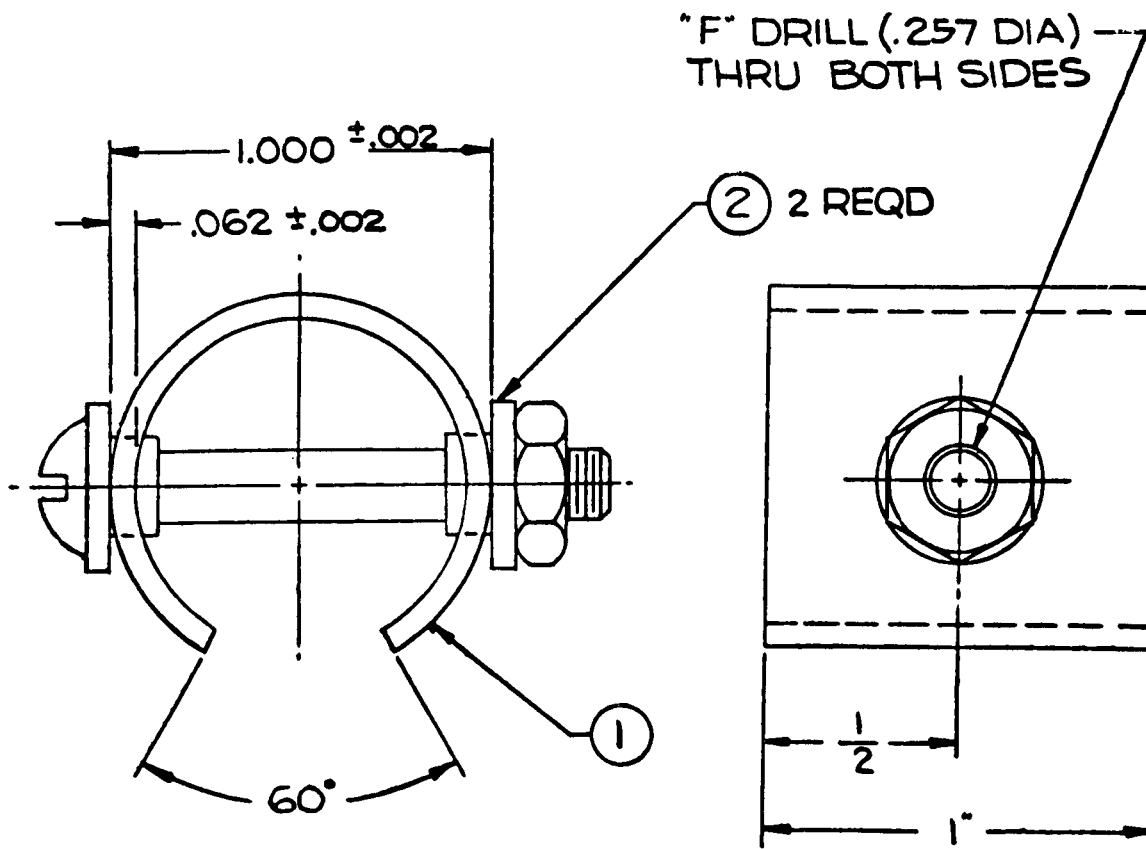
A. C-RING STRESS CORROSION ASSEMBLY
